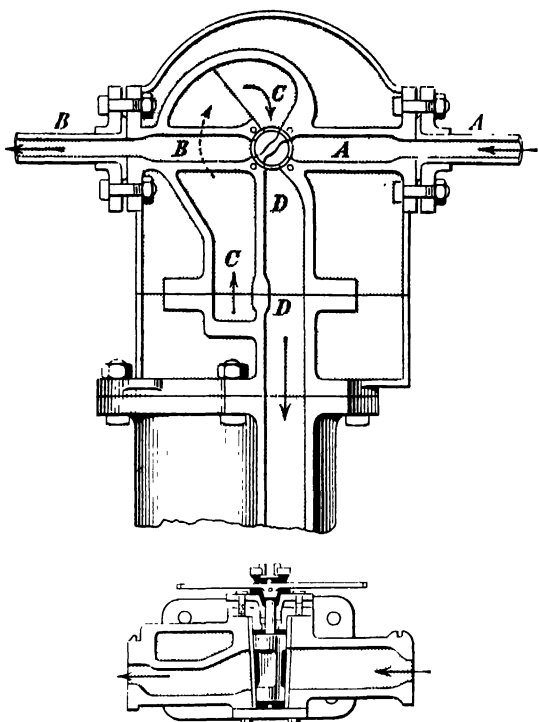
KENNEDY METER: SECTION THROUGH PORTS
